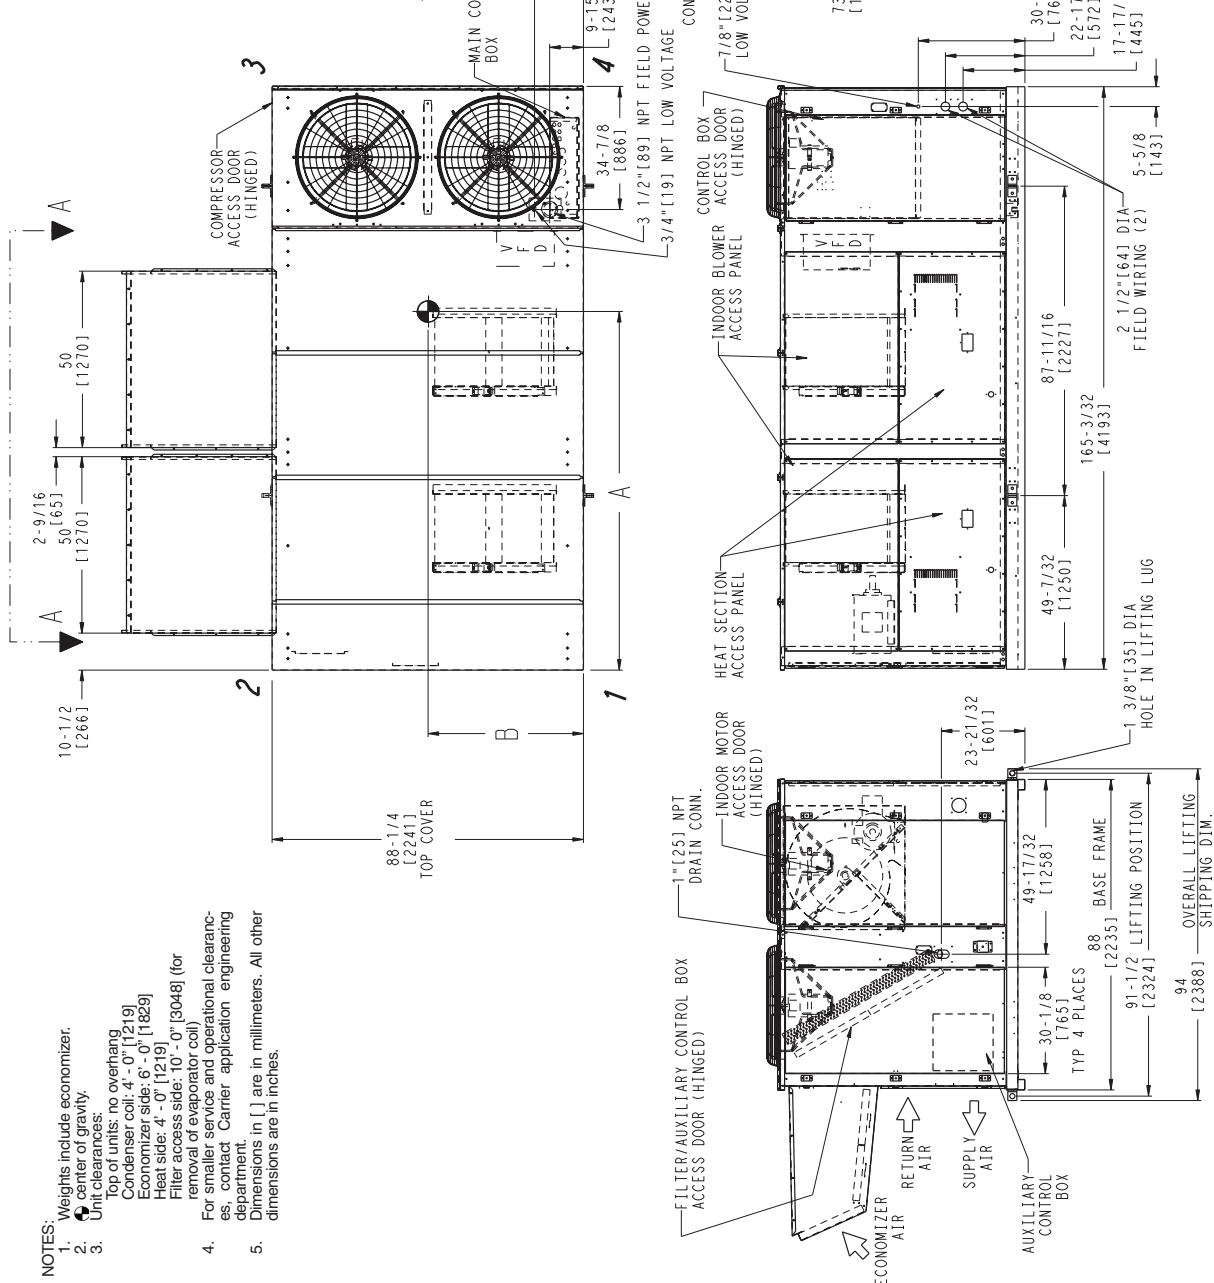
Base Unit Dimensions — 50AJ/AK060
